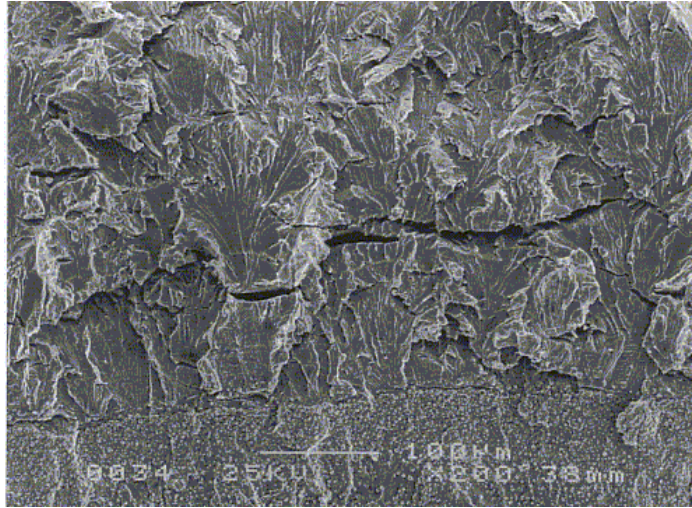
Fracture surface morphology of AISI 321 steel specimen tested using a high displacement rate showing almost pure transgranular cracking (specimen No. 4, tested using the displacement rate of 3.0×10^{-6} mm/s).
